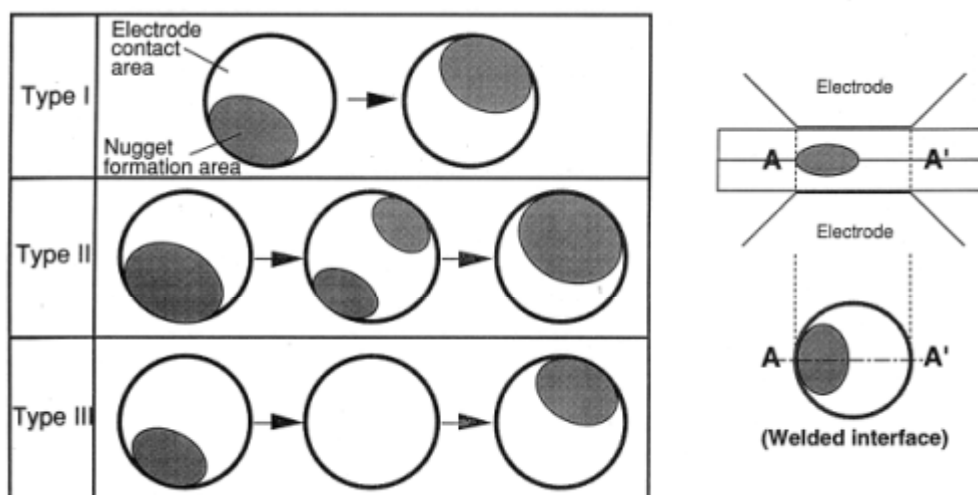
Schematic illustration of the transition behavior in location and size of nugget during consecutive welding of aluminum alloy sheets.
